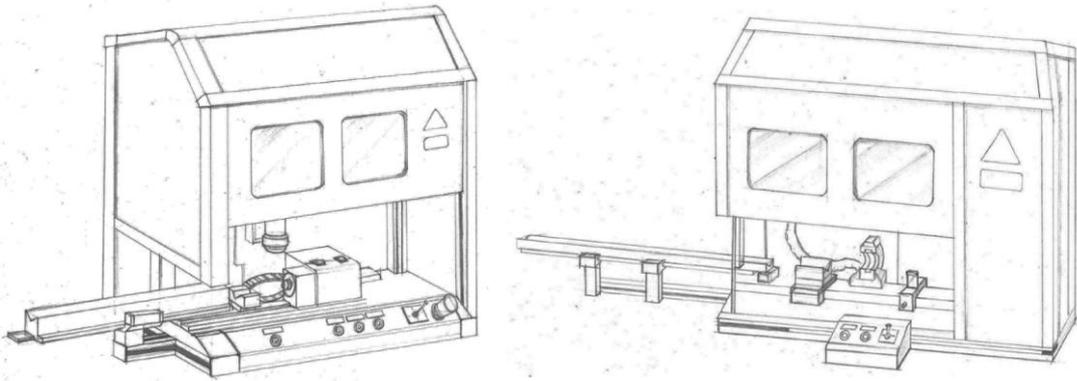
Sketches of the laser welding machine type 1410 (left) and 1244 (right).
